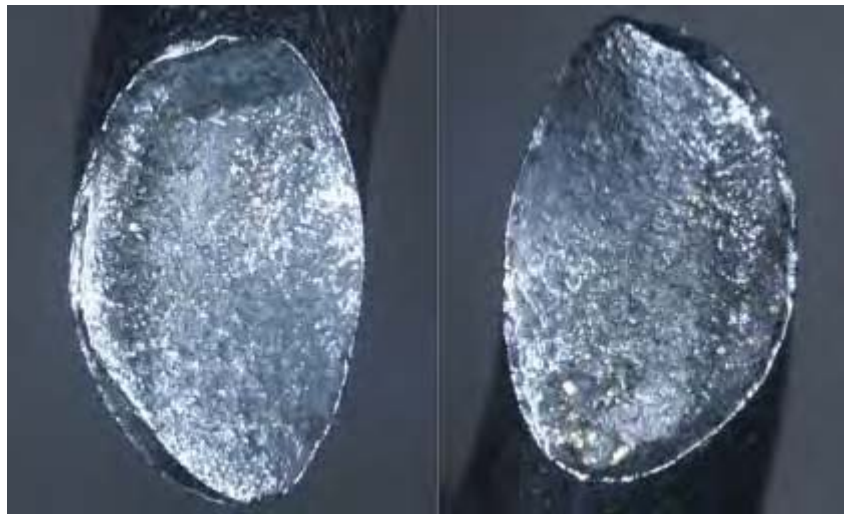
Enlarged imaging of the fracture. Actual wire diameter is 0.285 cm. Side one of the fracture (left). Side two of the fracture (right).
